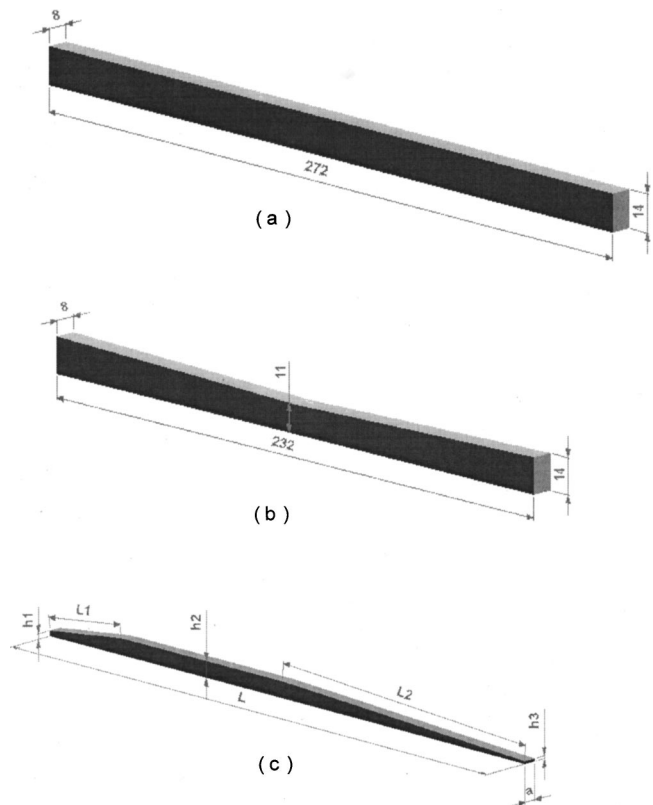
Shape and size (mm) of: (a) upper bar; (b) lower bar; (c) rod.
